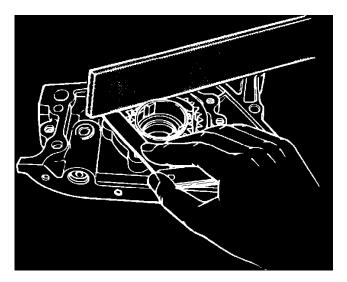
Checking oil pump gear side clearance. Rotory type similar
